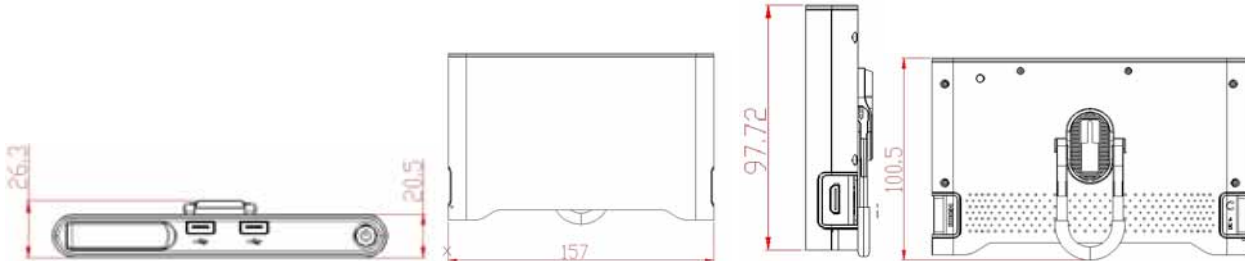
MP-292 (157*97.72*26.3mm) Dimension
